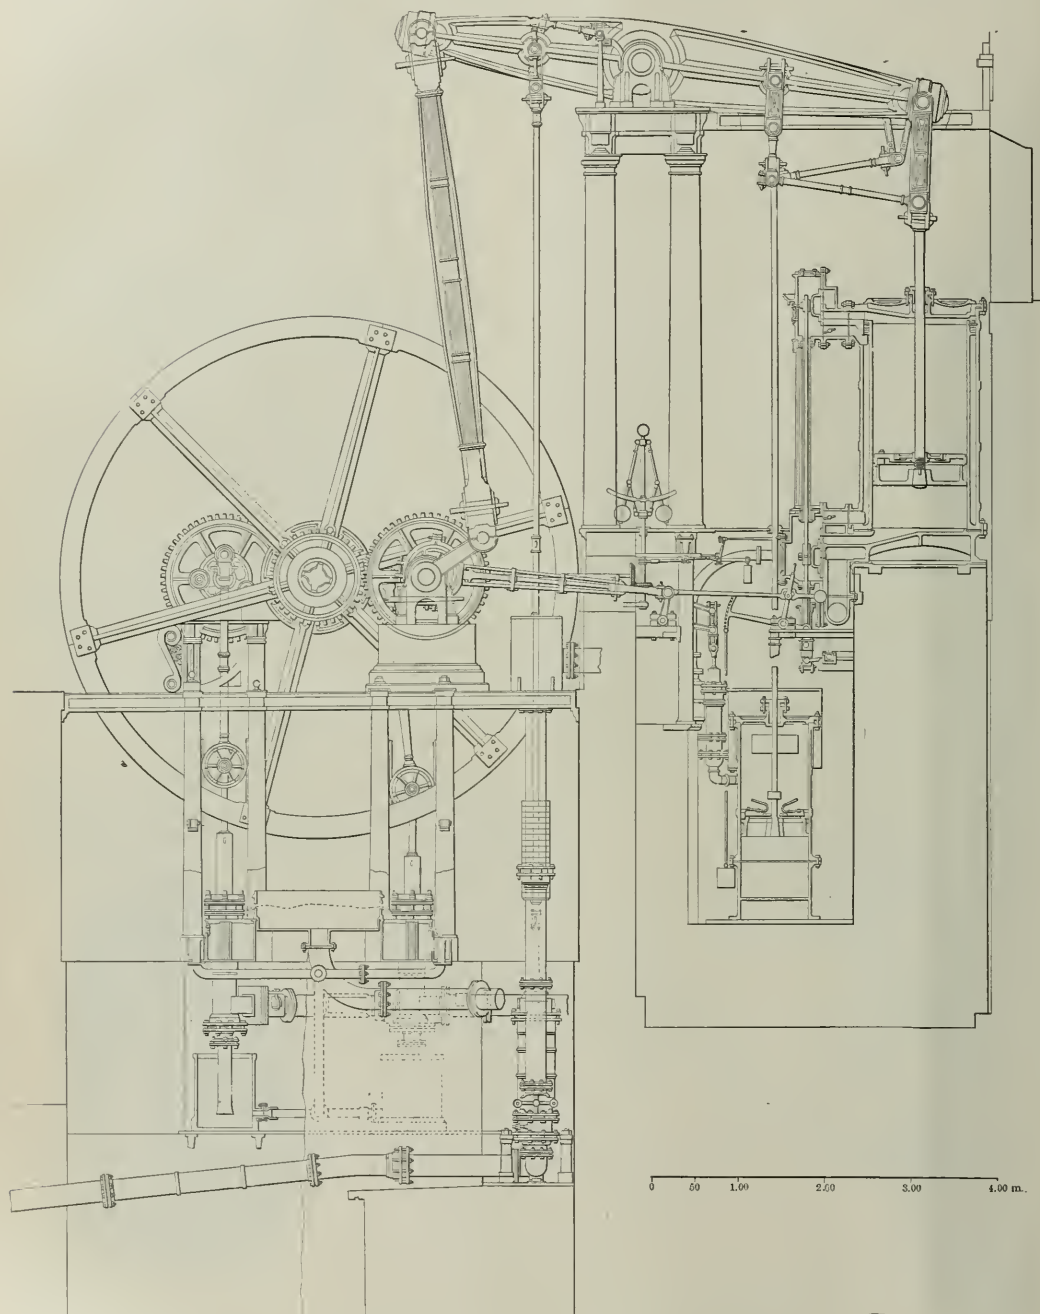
Elevation of the Versailles Water Works Engine at Marley.
